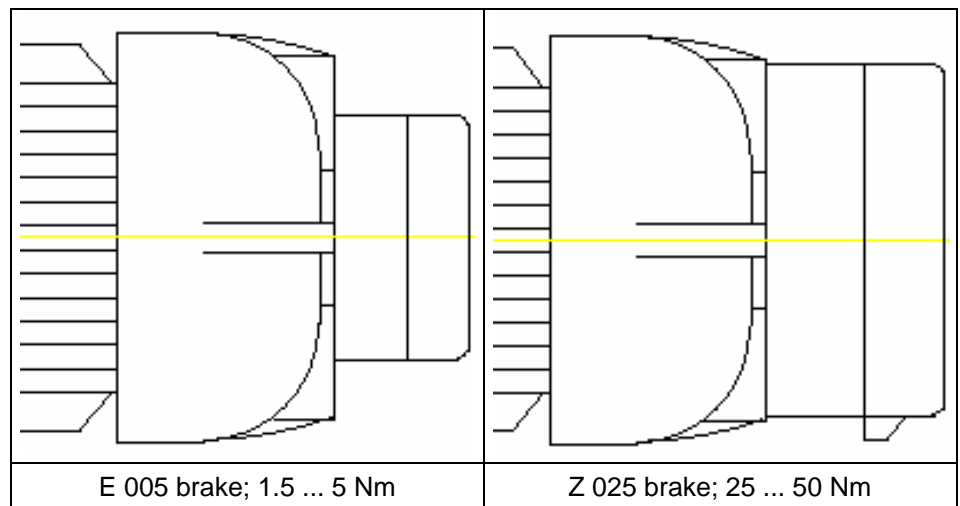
Comparison of the smallest and largest built-on brake on a D09 motor
